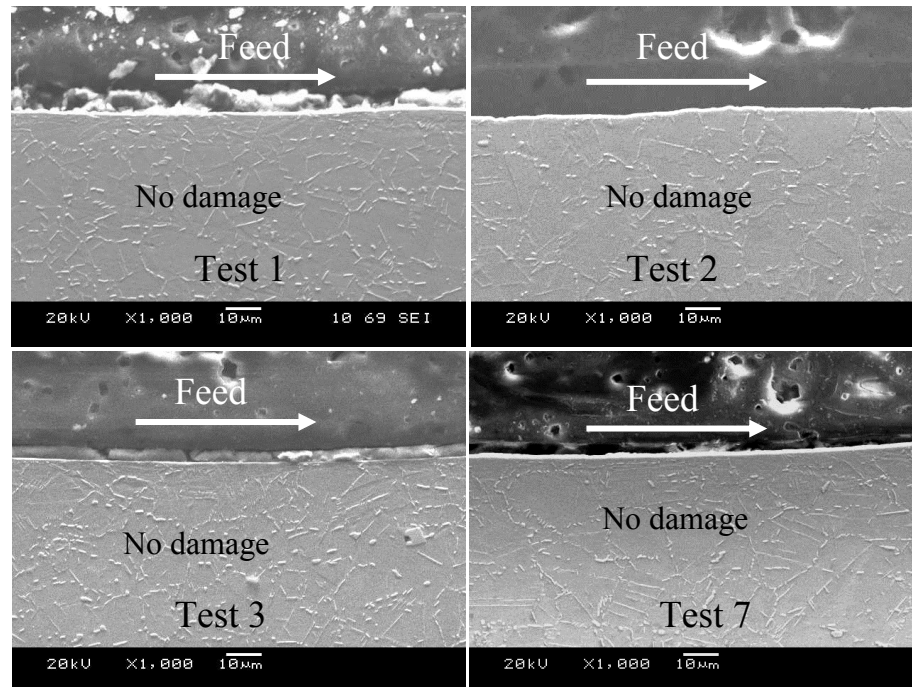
Cross sectional SEM images of workpiece sub-surface of Tests 1, 2, 3 and 7 produced with new tools in a direction parallel to feed
